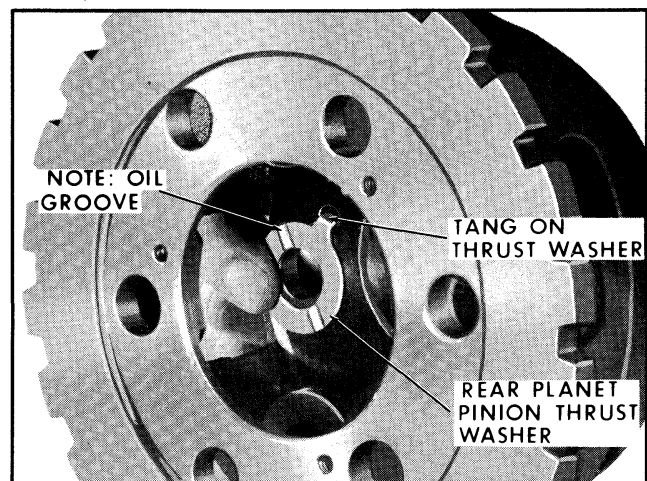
B-92 Installing Long Pinion Rear Thrust Washer
